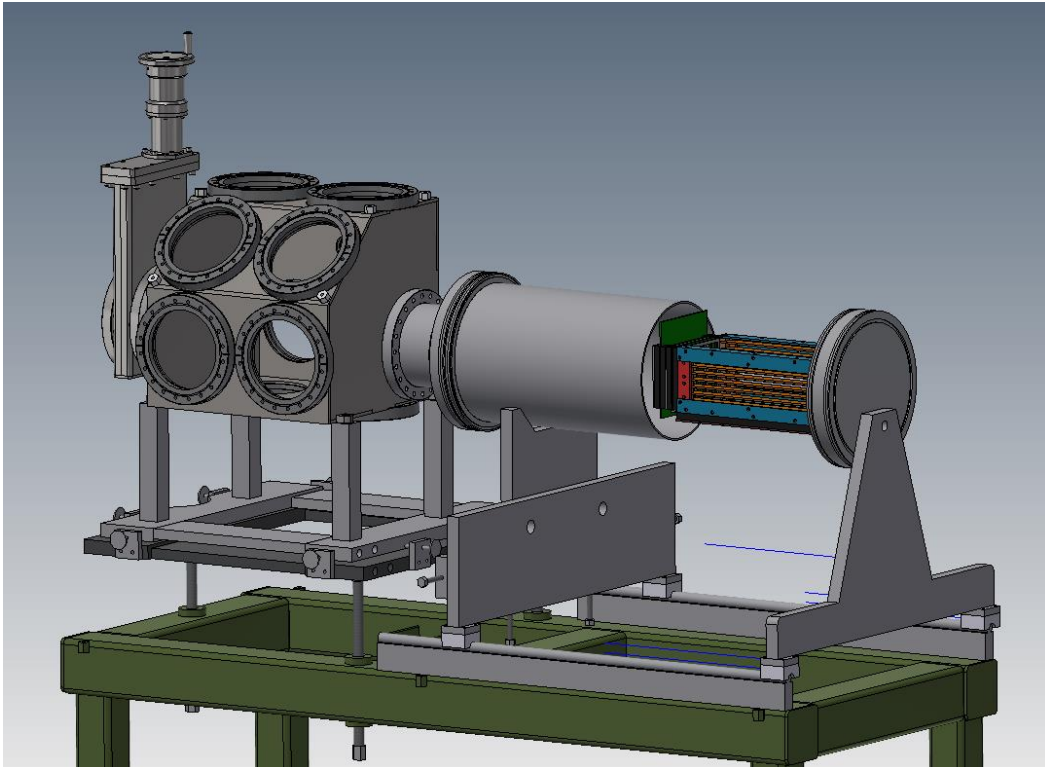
Electronics of ionization chamber in exploded view showing the removability from the housing.
